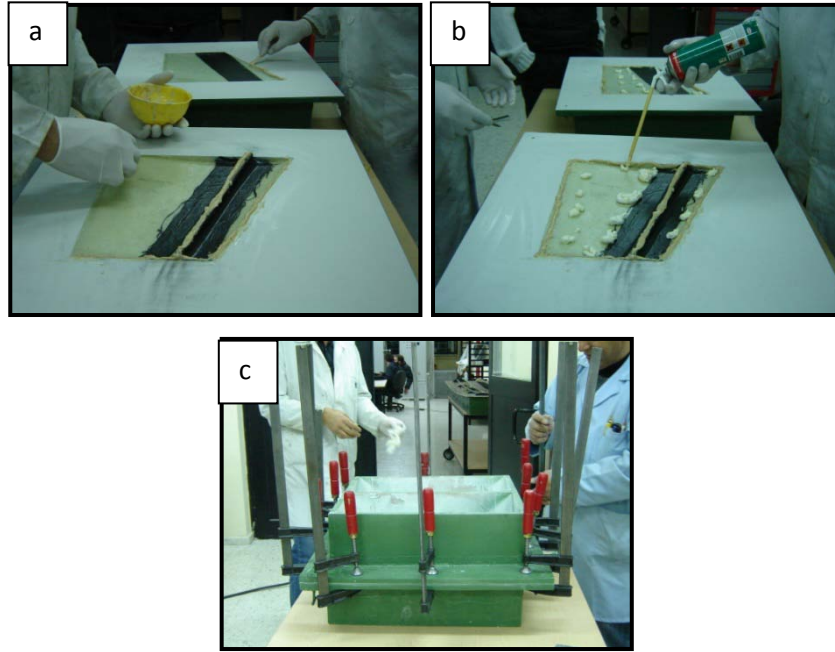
Adhesive is applied to surfaces of contact (a), Polyurethane foam is sprayed to hollow areas (b), Molds are clamped together (c)
